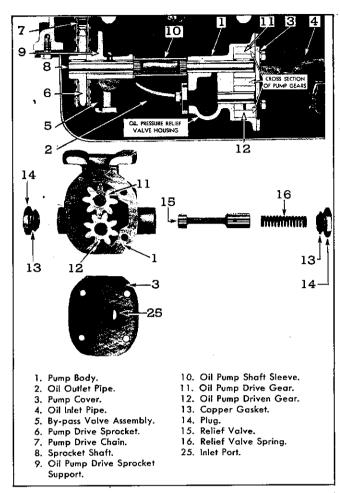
Three and Four Cylinder Lubricating Oil Pump Assembly and Mounting.
